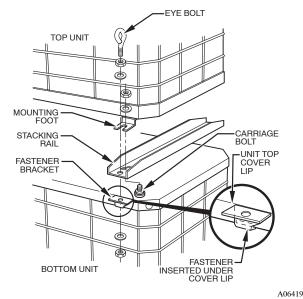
Securing Fastener Brackets, Mounting Feet, and Stacking Rails
